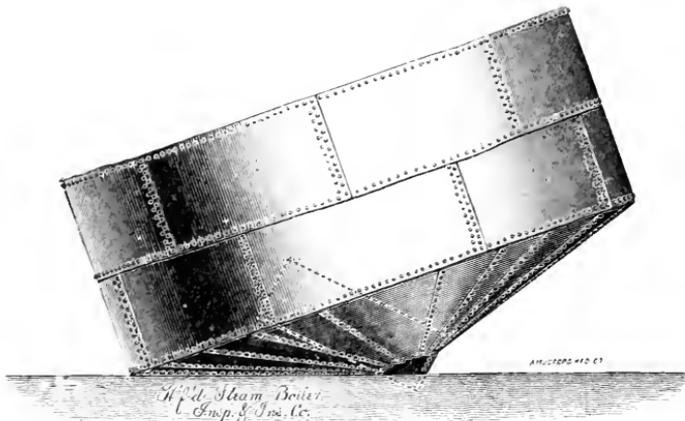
POSITION OF THE STILL AFTER THE EXPLOSION.
